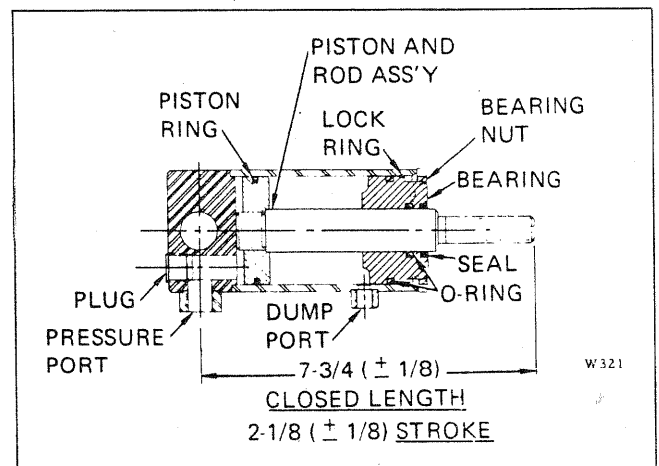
HYDRAULIC BRAKE CYLINDER REPAIRS, POWER CONTROLLED WINCH ONLY
